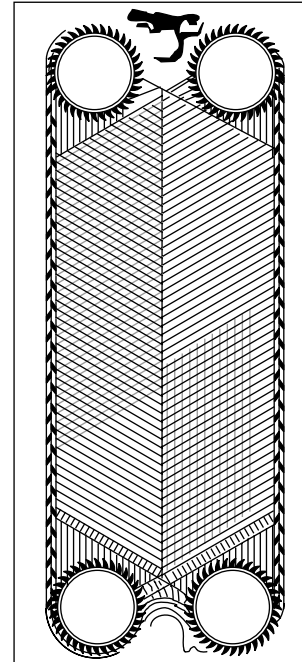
(a) Plate heat exchanger built up of corrugated plates assembled to optimize heat transfer
